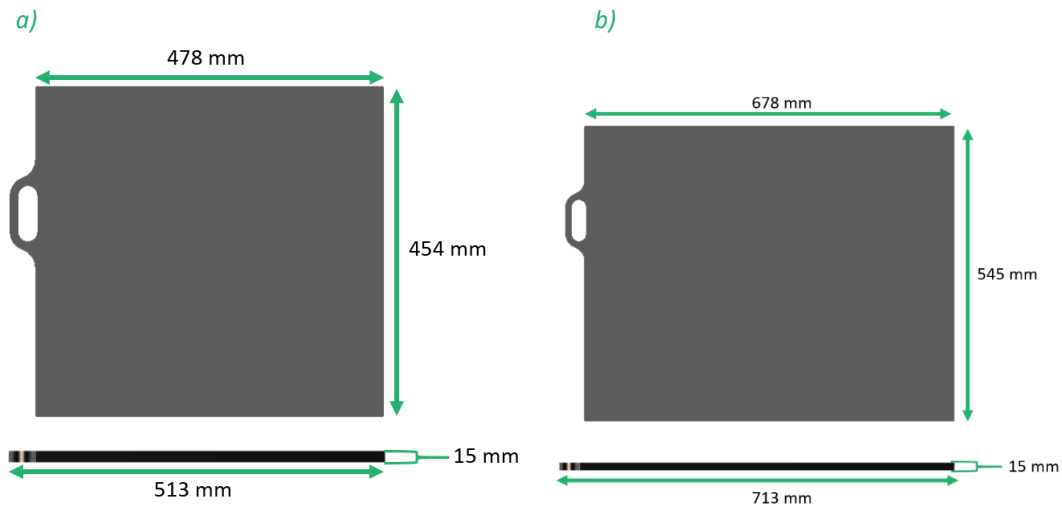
Module plate design with correspondent dimensions for the a) Solitek and b) Siro
